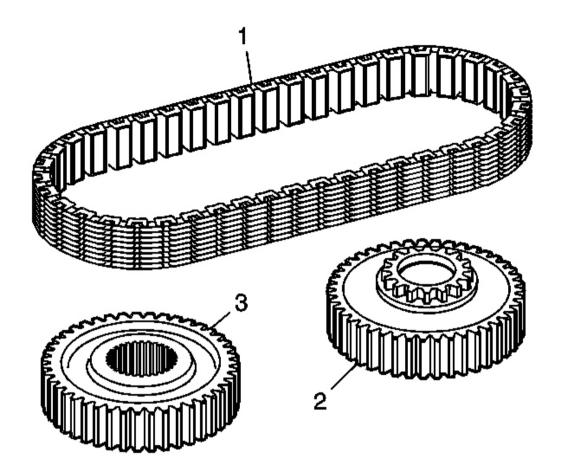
Drive Chain, Drive Sprocket & Driven Sprocket Courtesy of GENERAL MOTORS CORP.
